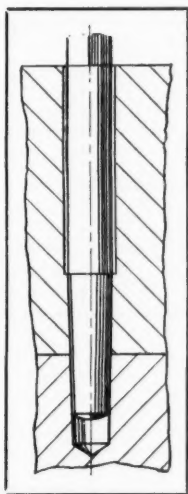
Drawing showing design of taper pin for application in counterbored hole of such size that will not bind upper body of pin.
